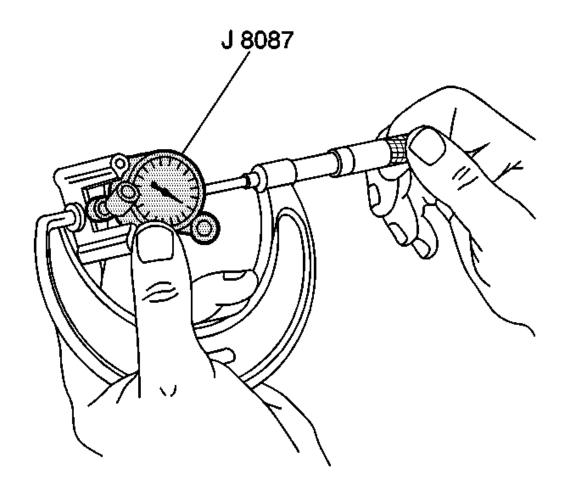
Measuring Bore Gauge With Micrometer Courtesy of GENERAL MOTORS CORP.
